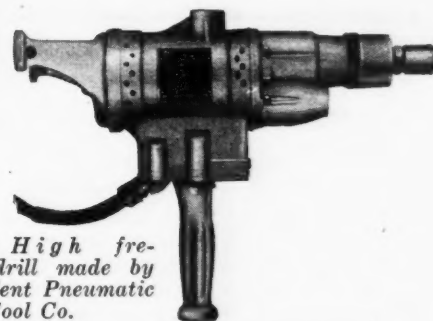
High frequency drill made by Independent Pneumatic Tool Co.
